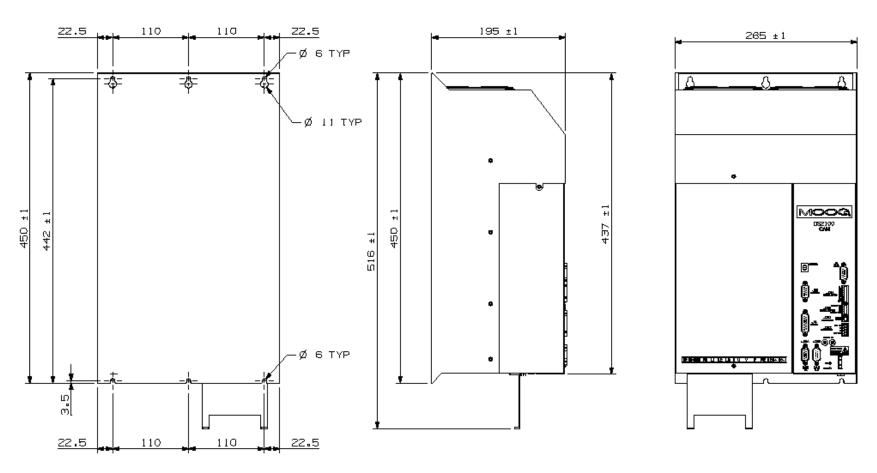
DS2100 D Mechanical & Mounting Dimensions
